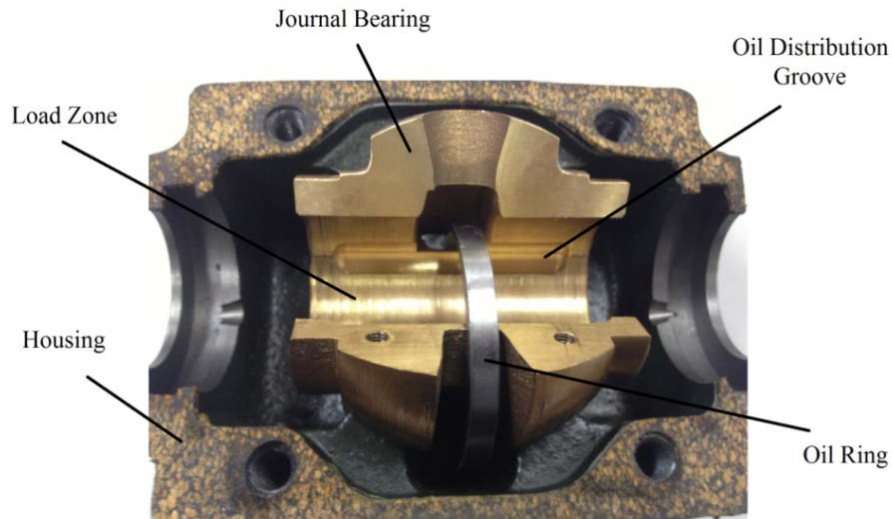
Lubrication system in self-aligning spherical journal bearing
